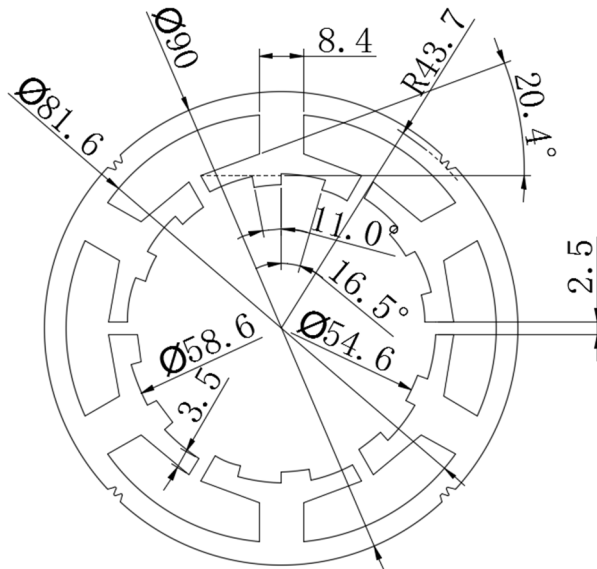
6-slot stator dimensions for 6/14 CPM-FRPM machine.
